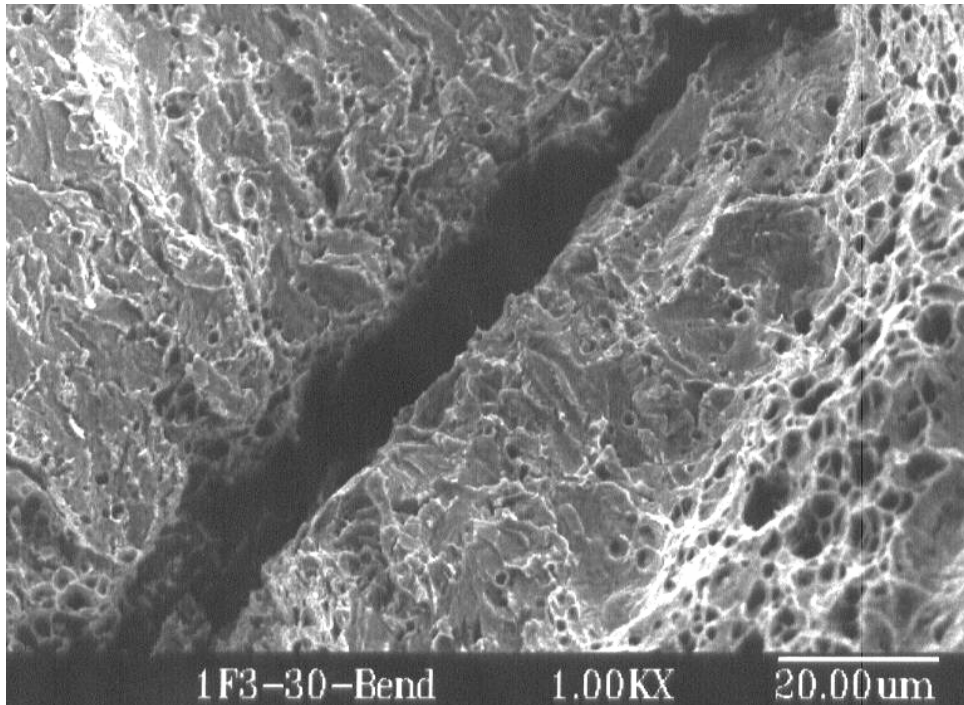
A micro-crack oriented perpendicular to the bend-test fracture surface acting as an initiation point for brittle fracture.
